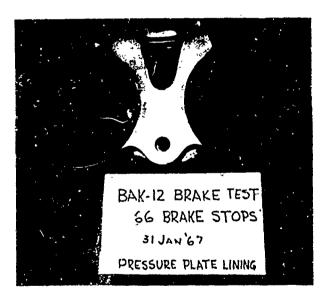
Most Heavily Damaged Brake Pad on the Pressure Plate
